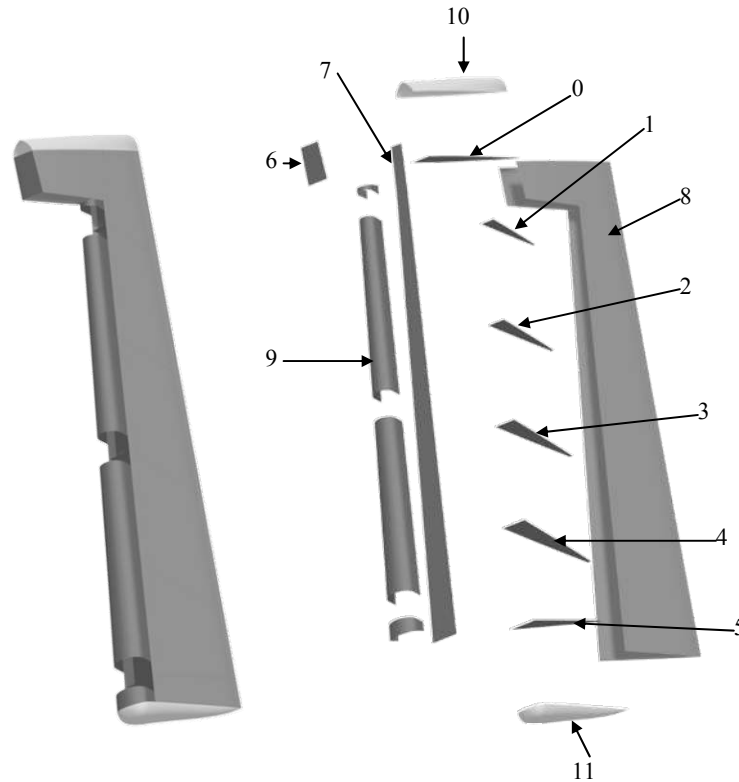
The Eaglet rudder manufacturing baseline with an exploded view
